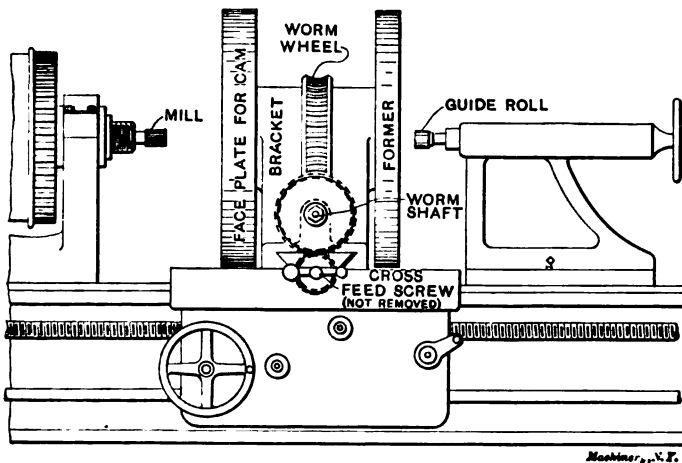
Attachment with Power Feed for Cutting Face Cams
